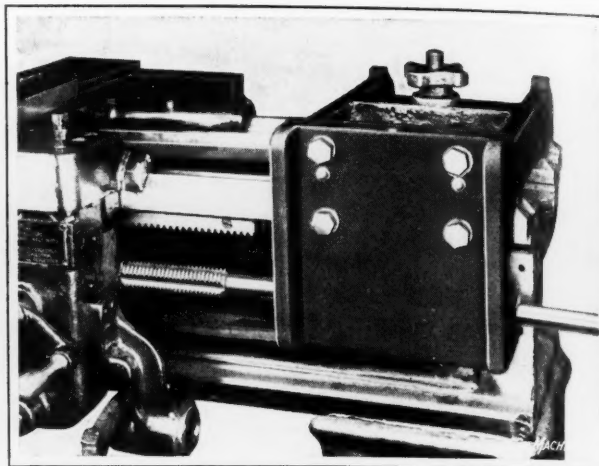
Special Fixture used in finish-tapping the Apron Half-nuts in Proper Relation with the Bed Vees
